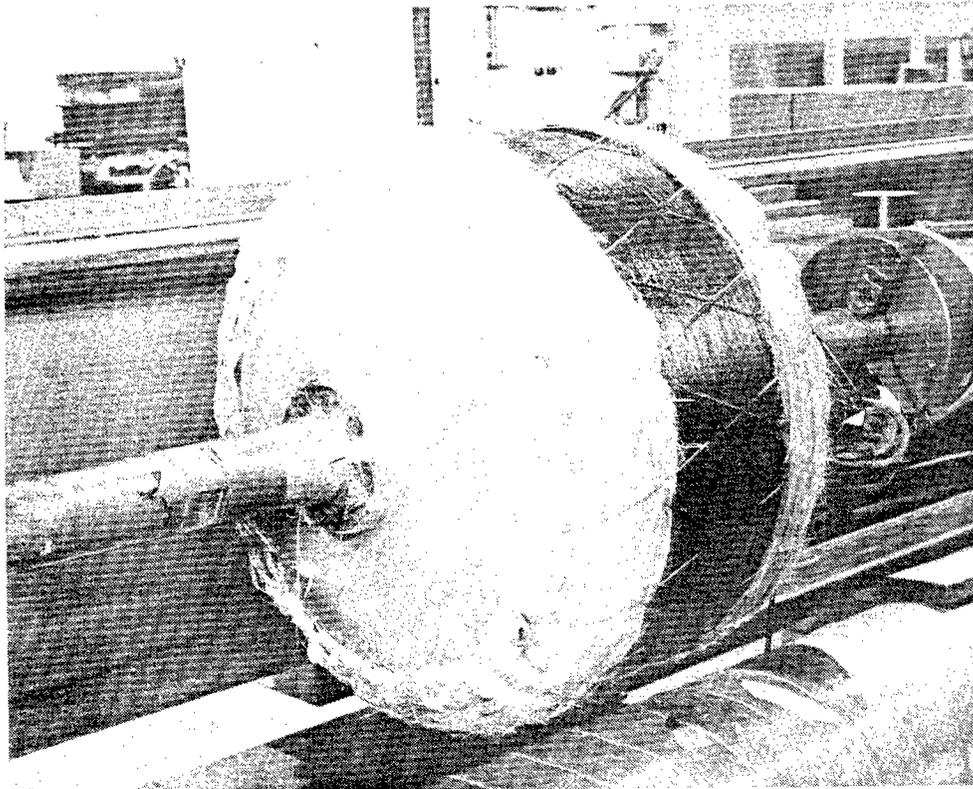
4 Holding Build-Up Strips in Place
